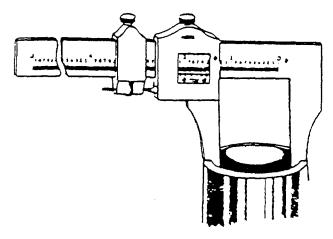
Taking an inside measurement with a vernier caliper.
